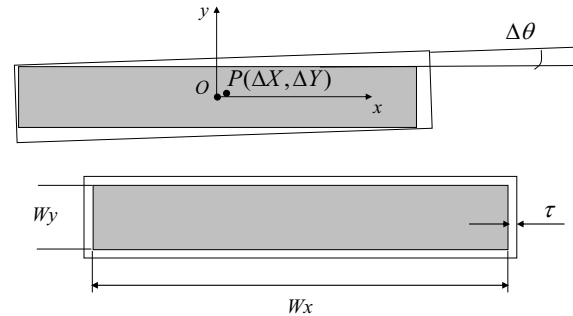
The representation of C-space of the similar rectangular hole-in-peg assembly and the clearance of assembly
